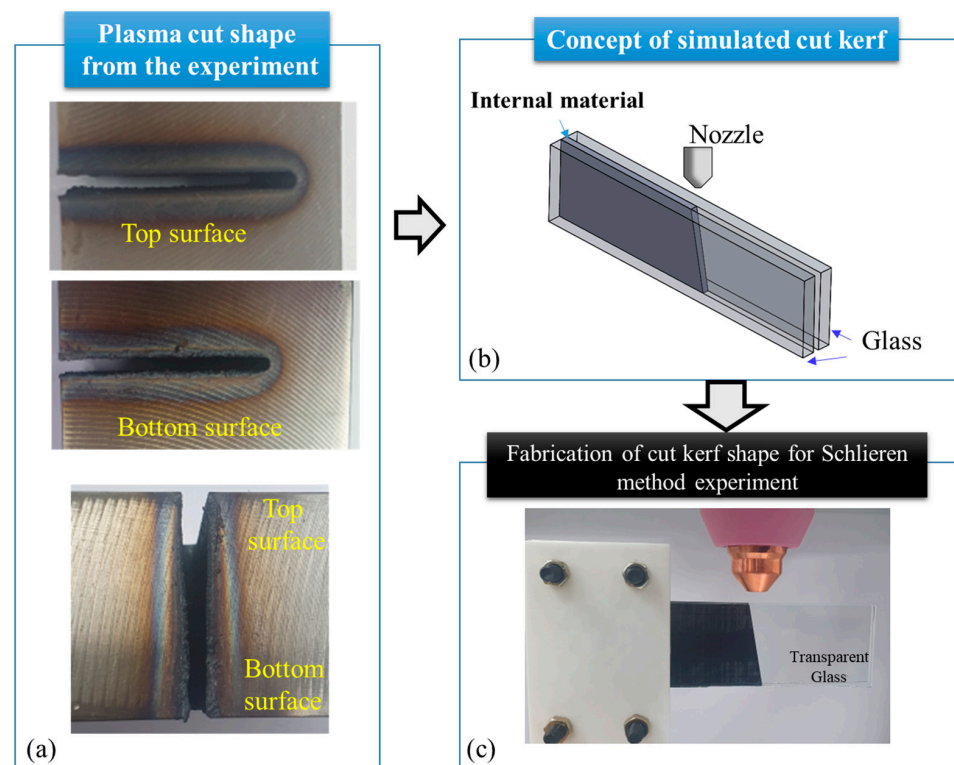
Process of fabricating cut kerf shape assembly for Schlieren experiment. (a) Plasma cut sample; (b) kerf geometry design for Schlieren experiment; (c) fabricated kerf assembly for Schlieren experiment.
